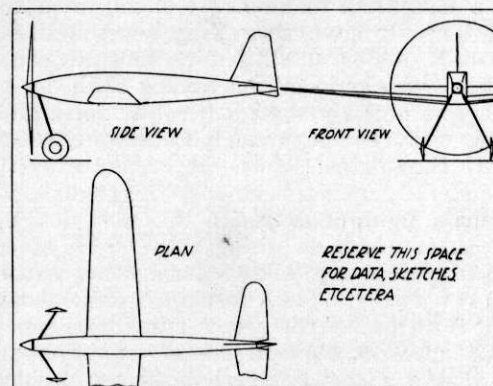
Standardised Lay-out of a General Arrangement Drawing.
